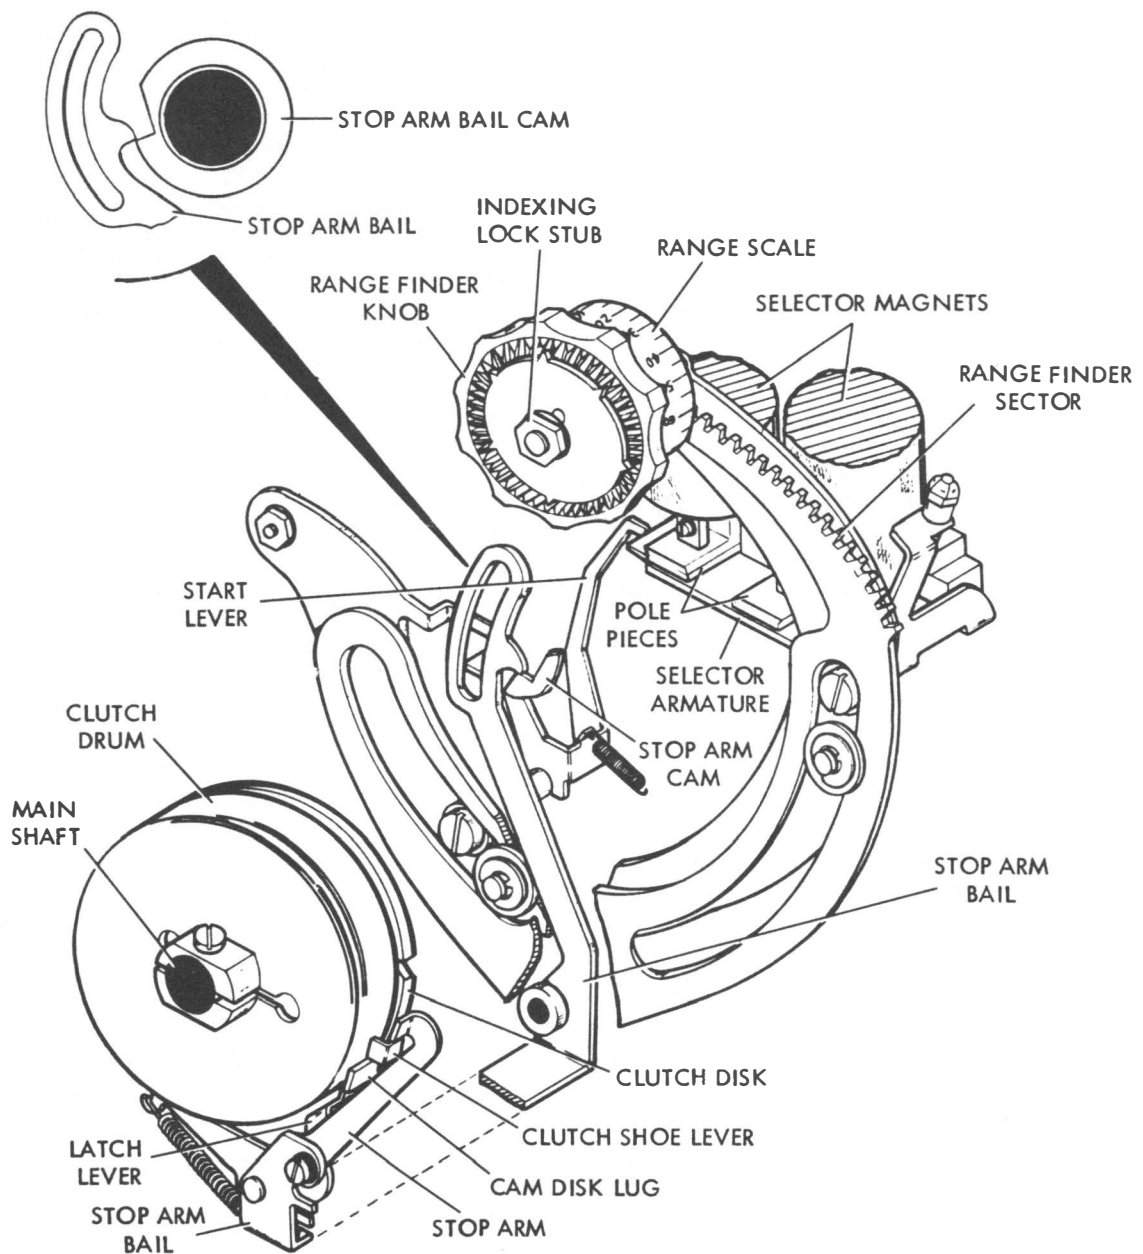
Range Finder and Selecting Cam Clutch Trip Assembly
